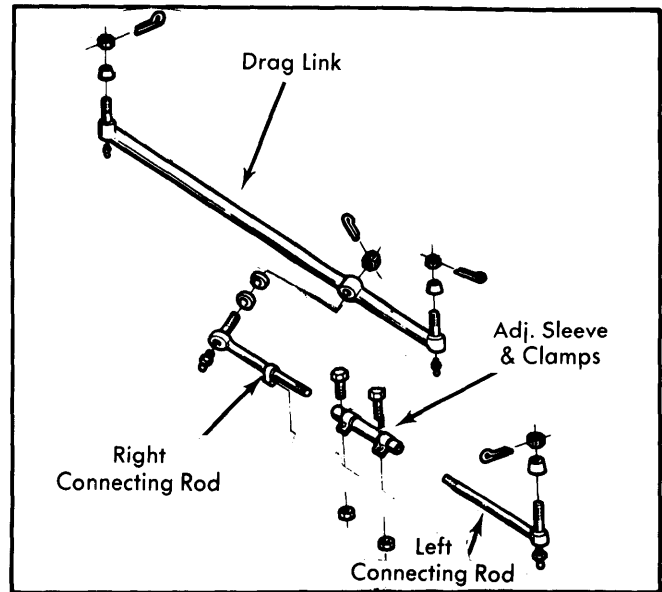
Disassembled View of Steering Linkage (E100-350, F100-350)
